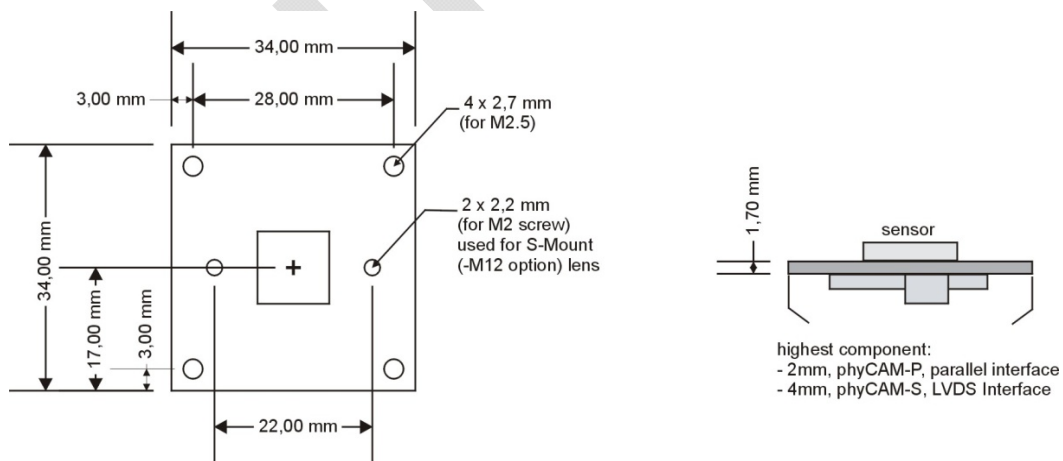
phyCAM Printed Circuit Board (PCB) Dimensions
